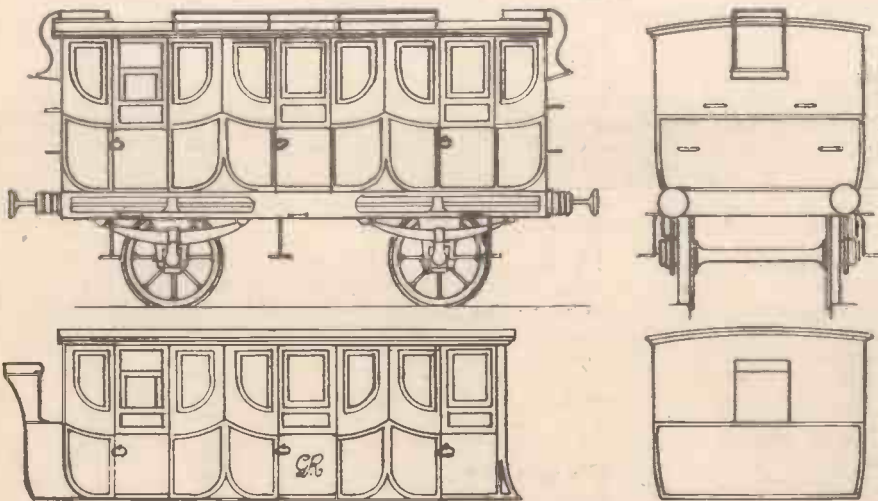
Side and end views of a 1st class coach and a mail coach.
